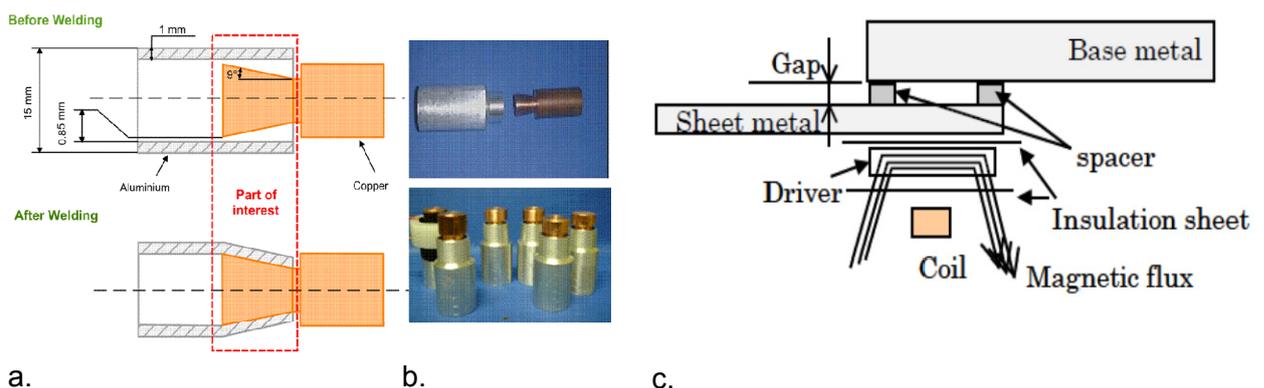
(a) MPW of two tubes, (b) Cu/Al parts before and after welding [8], (c) Schematic of the magnetic pulse seam welding process [9,10].
